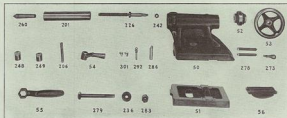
Tailstock Parts for Series "S" South Bend Lathes.
